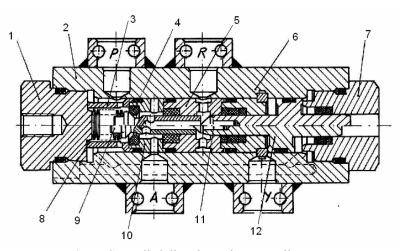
Controlled direction valve normally open: 1- bored plug; 2- valve body; 3-spring guiding; 4- valve seat; 5-intermediary sleeve; 6- sleeve; 7- gland; 8- spring-disc; 9- control rod; 10- pass through sleeve; 11- sealing taper; 12- piston.
